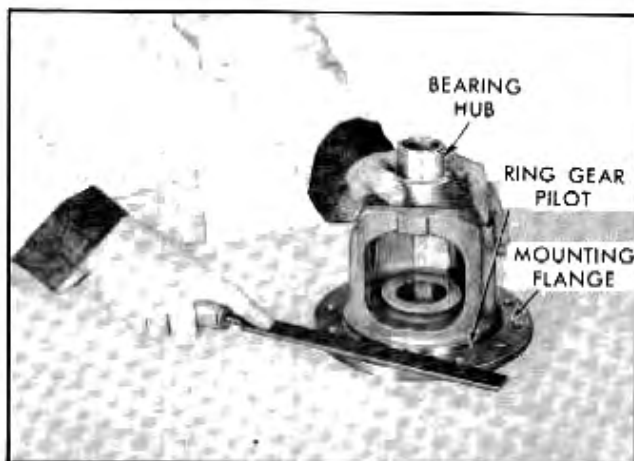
Removing Burrs and Nicks From Mounting Flange
